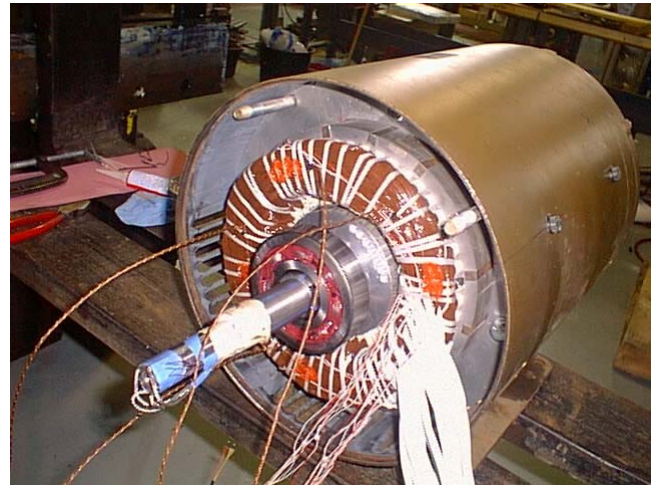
View of completed 50 kW IPM machine stator/rotor assembly
